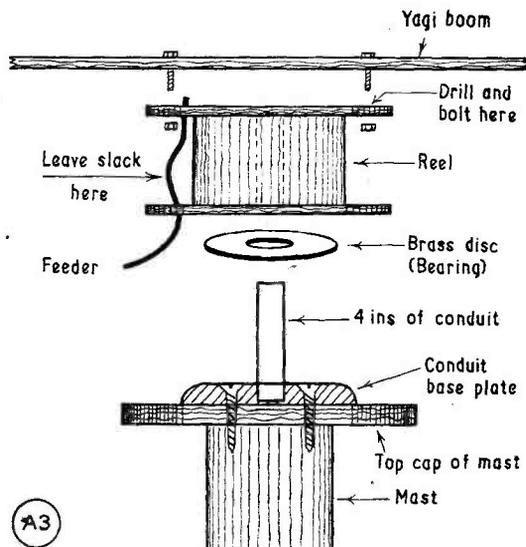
The suggested method of mounting and rotating the completed three-element beam for Two Metres. The feeder line is passed through holes drilled in the top and bottom surfaces of the wooden reel, enough slack being left in the space to prevent the feeder being twisted off when rotated.
